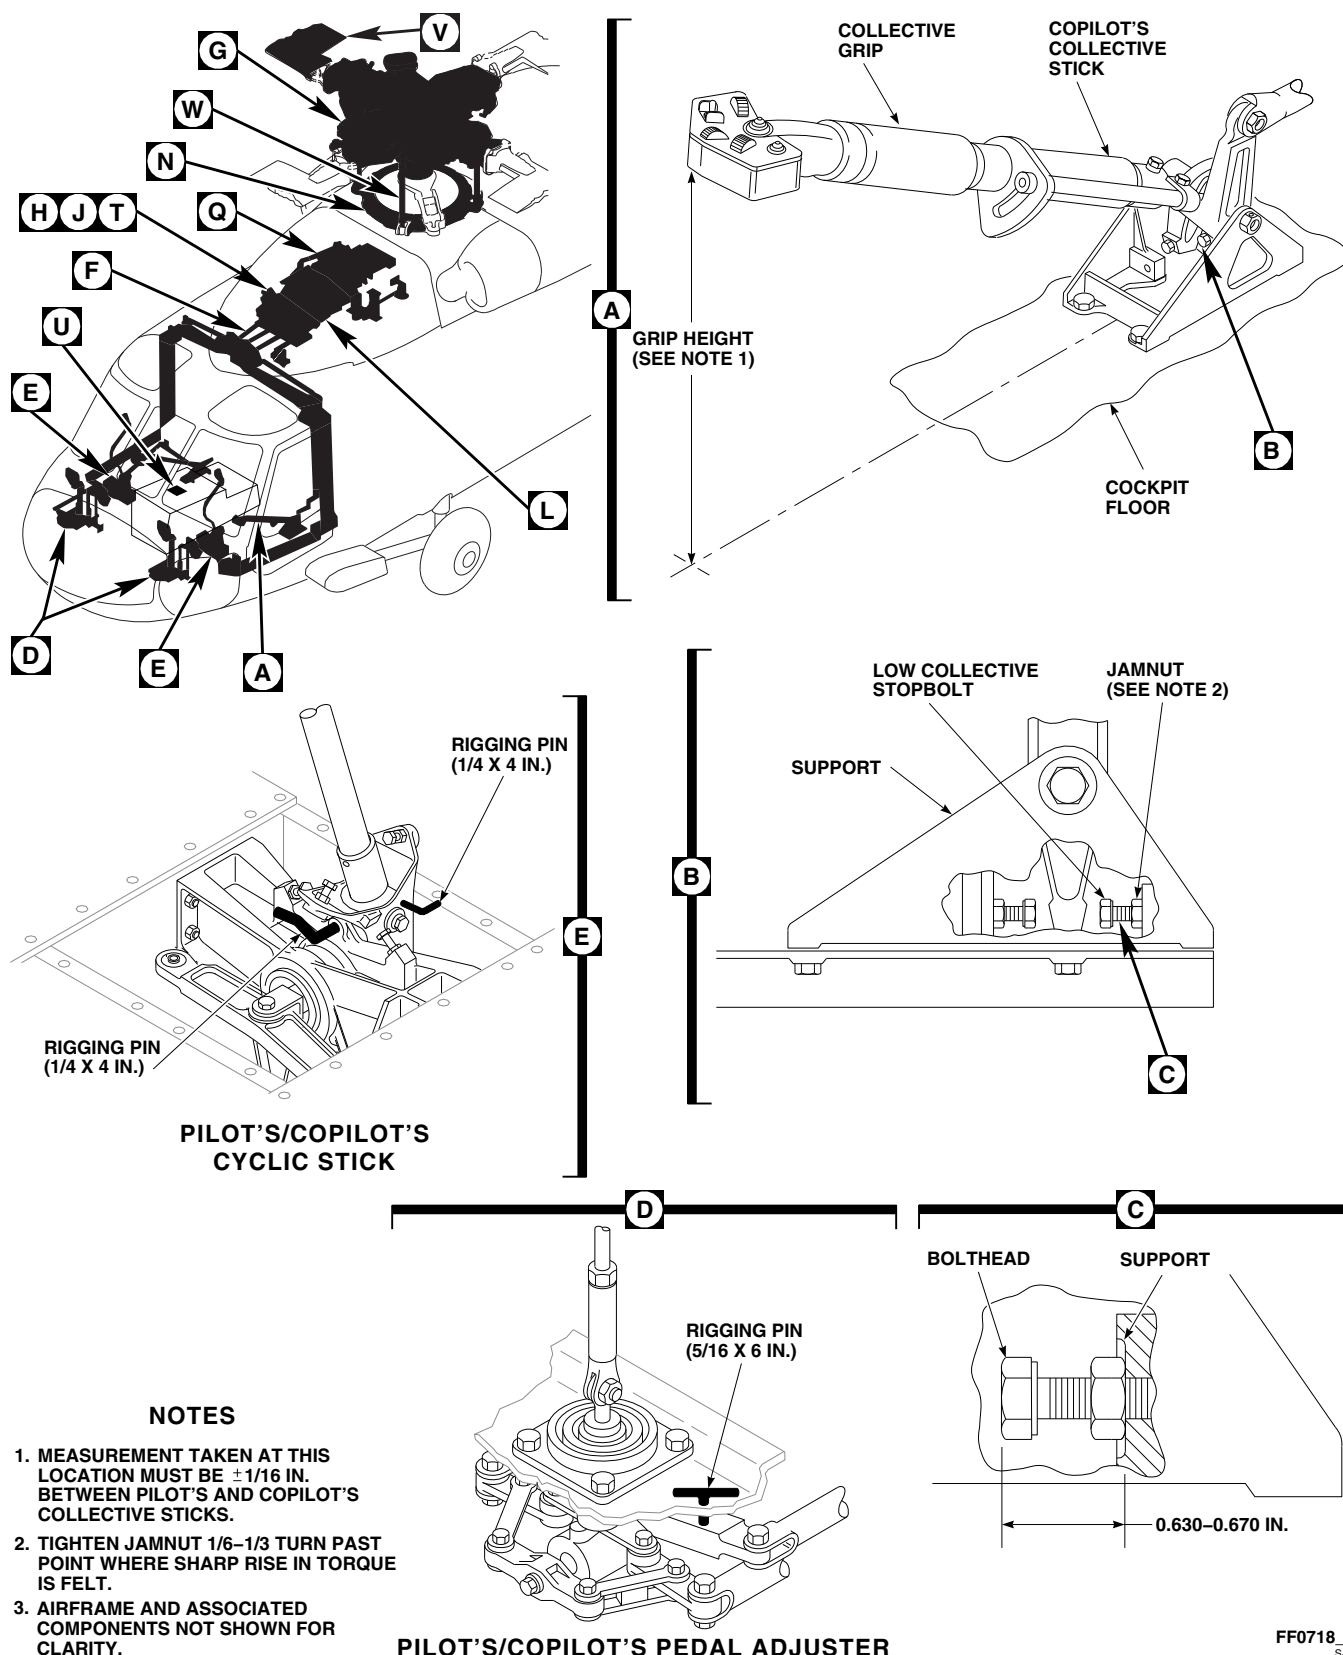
RIG MAIN ROTOR SYSTEM (SHEET 1 OF 6)
